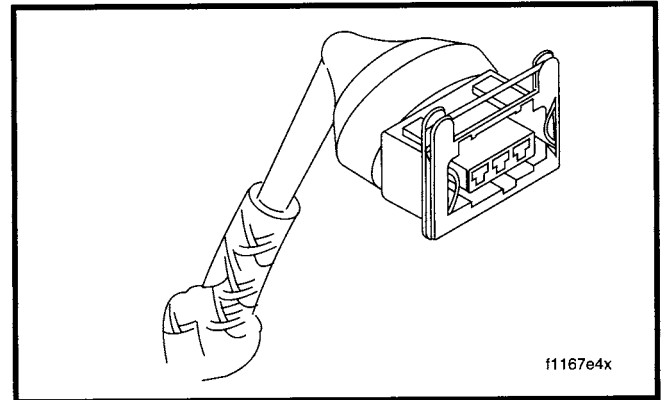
Amp Wireform Electrical Connector (Socket Side)
